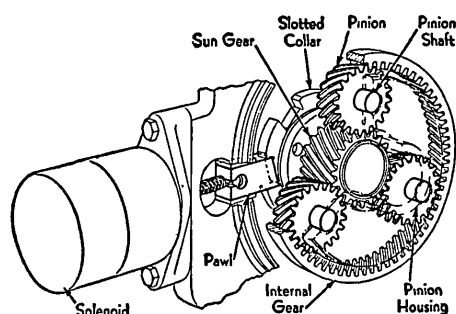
Through the planetary unit shown, the overdrive provides a higher gear ratio, and when in operation, engine speed is approximately 30 per cent slower than when operating in conventional high gear
